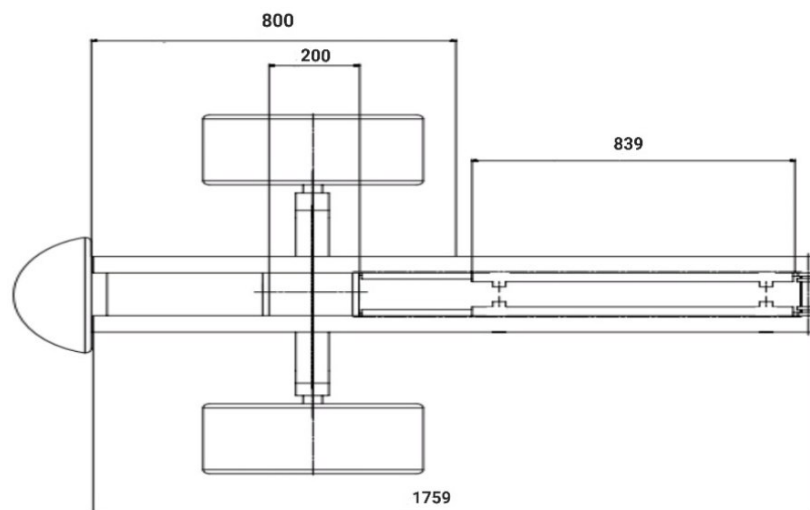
Dimensions of the tractor's frontal frame and placing hydraulic cylinders.
